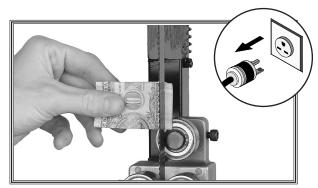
Example of using a dollar bill as a 0.016" gauge.
